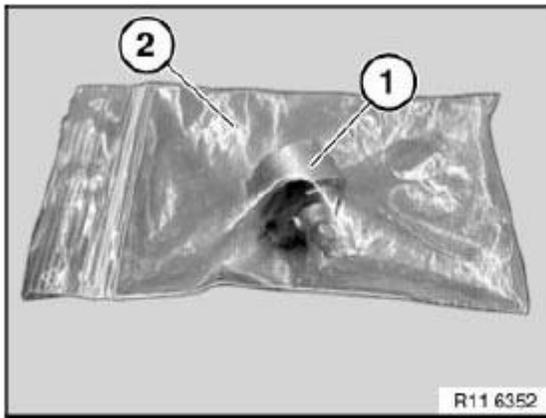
Identifying Magnet Wheel In Plastic Bag
